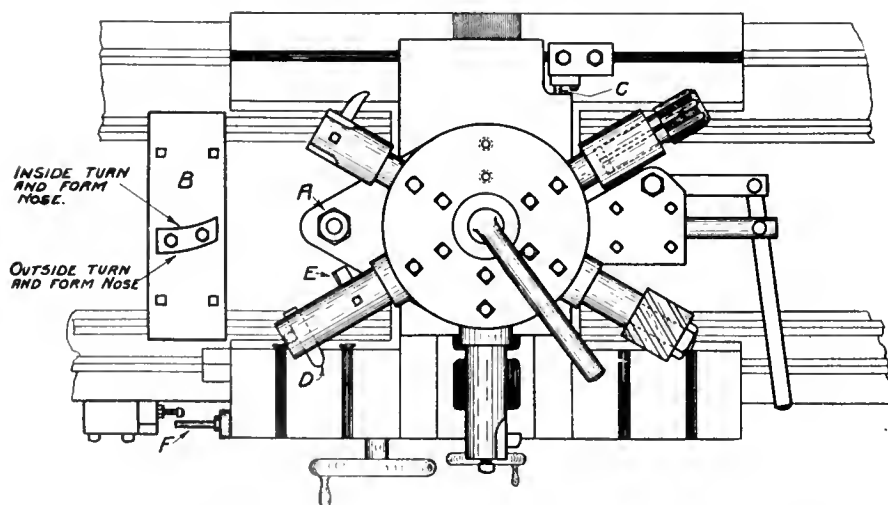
LONDON MACHINE TOOL CO. ENGINE LATHE EQUIPPED WITH SPECIAL TURRET ON CROSS SLIDE AND SPECIAL TOOLS FOR MACHINING SHELL NOSES.
